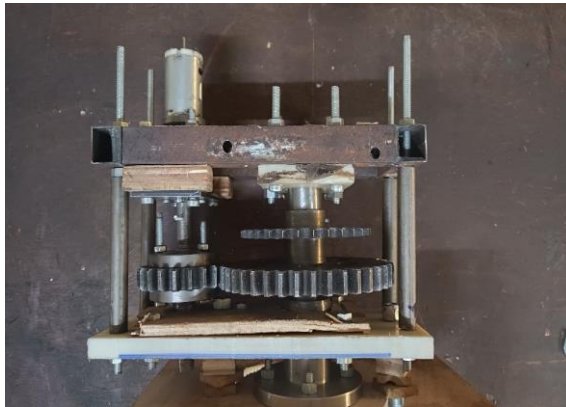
Gear assembly for rotating driving wheel assembly
